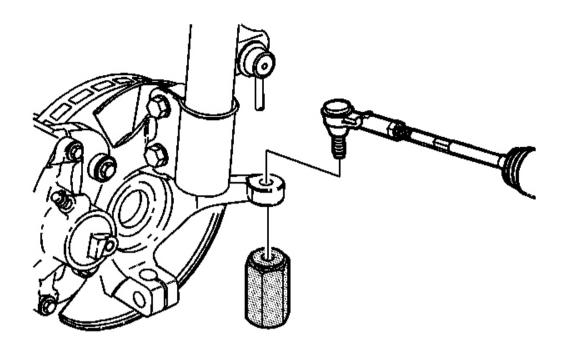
Tie Rod-To-Knuckle & J 44015 Courtesy of GENERAL MOTORS CORP.
